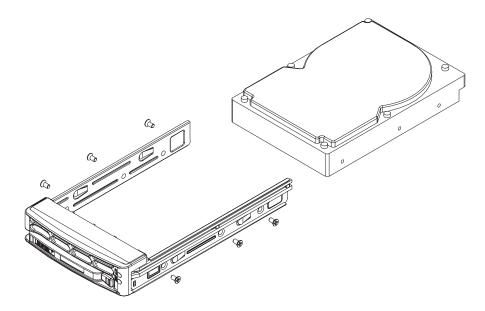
Mounting a SAS/SATA Drive in a Carrier
